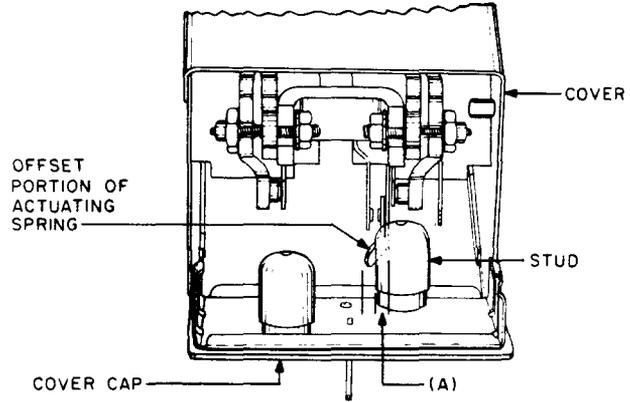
Method of Checking Contact Follow — 266A Relay Only
